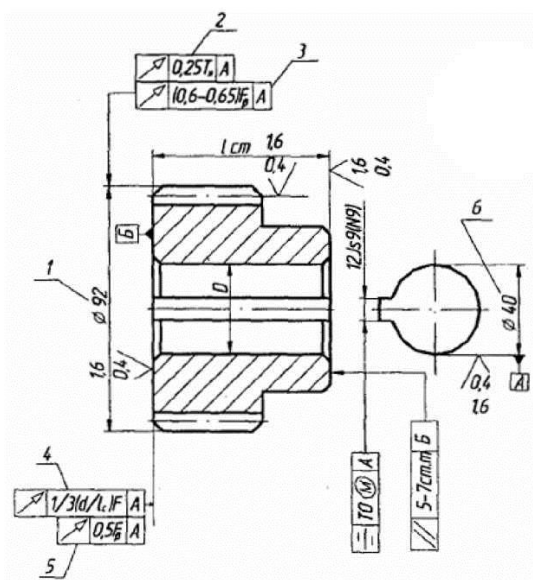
A gear wheel with requirements for the accuracy of its manufacture.
